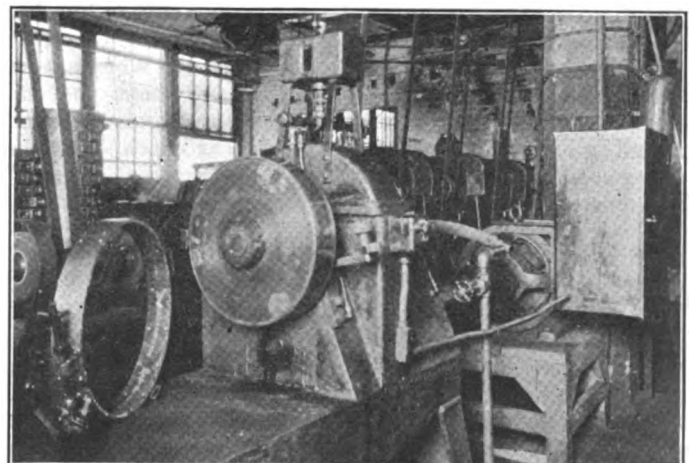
A SPECIAL MACHINE DEVELOPED BY THE PACKARD COMPANY FOR RUNNING-IN EXTERNAL BRAKE-BAND ASSEMBLIES
